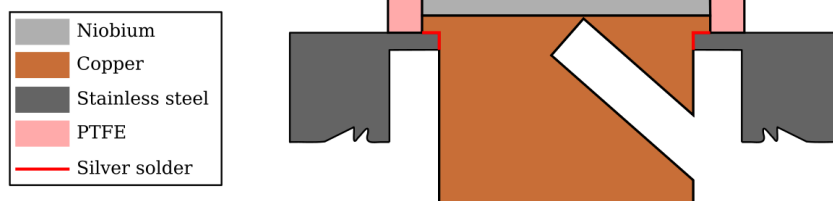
Sample block from Fig. 3.2 soldered to a 2.75" CF flange.
